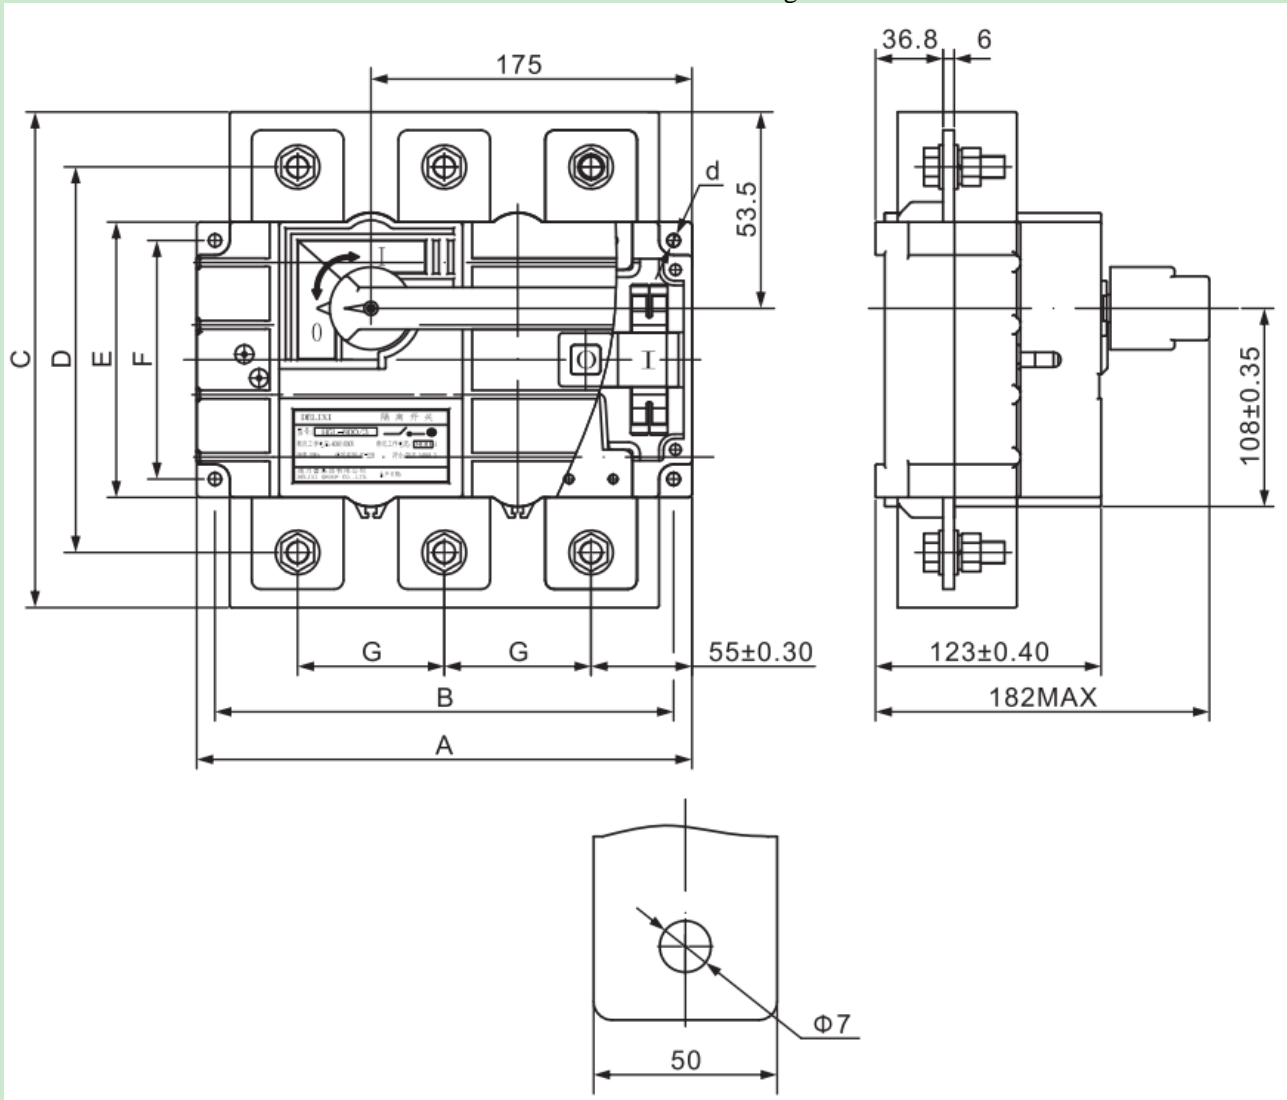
HGL-800T/3, 4 series switch disconnector installation dimensions
